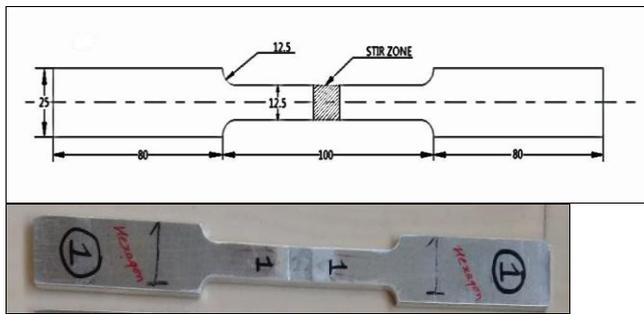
Dimensions of the Tensile Test Specimens [ASTM E8M-08]
